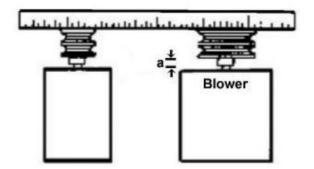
Correctly aligned belt drive Distance "a" must be minimized
